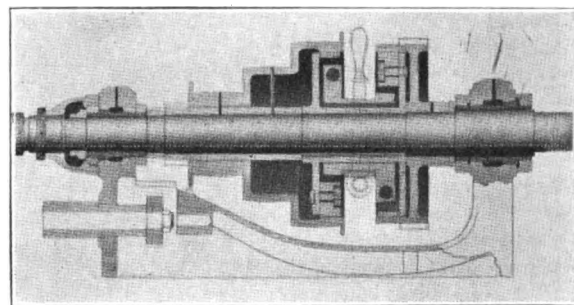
This Sectional View Shows the Lathe Head Stock.
